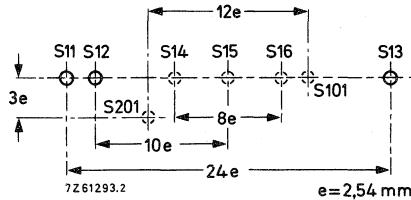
Hole pattern in the printed-wiring board for a single potentiometer (viewed on component side).
